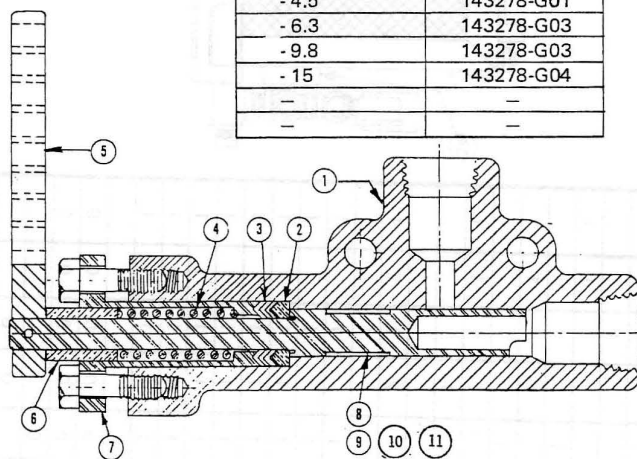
CIRCULATING VALVE ASSEMBLY
